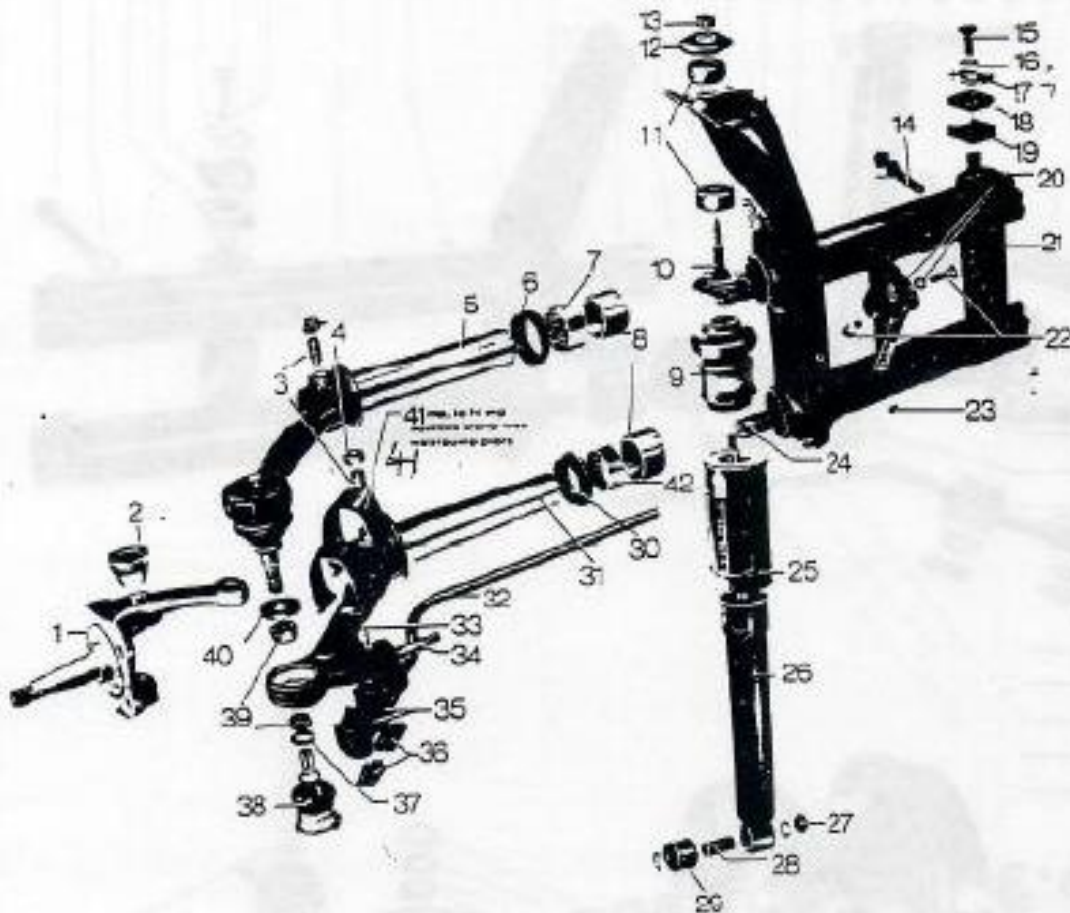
FRONT AXLE ASSEMBLY - BALL JOINT TYPE - EXPLODED VIEW
